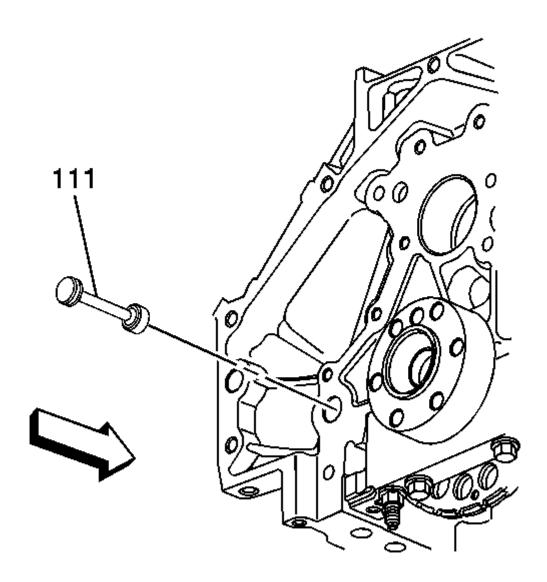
Identifying Engine Block Rear Oil Gallery Plug & Seal Courtesy of GENERAL MOTORS CORP.
